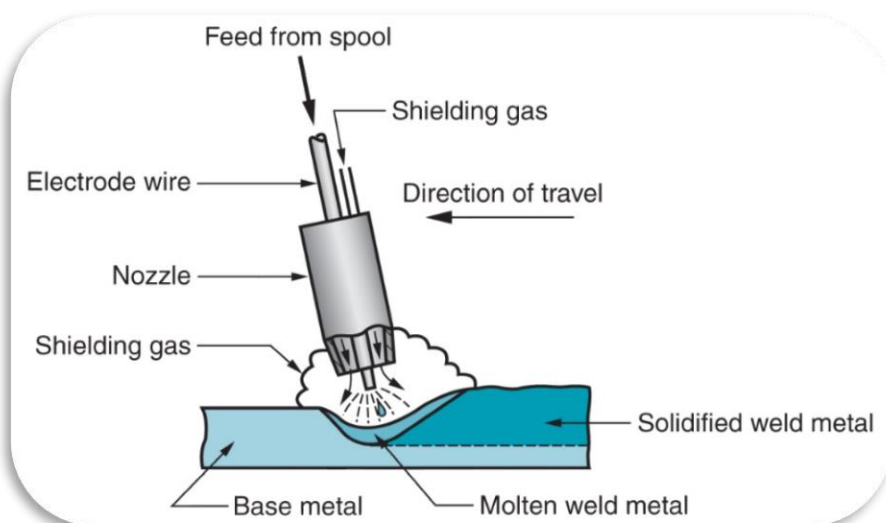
Gas metal arc welding (GMAW) set up
